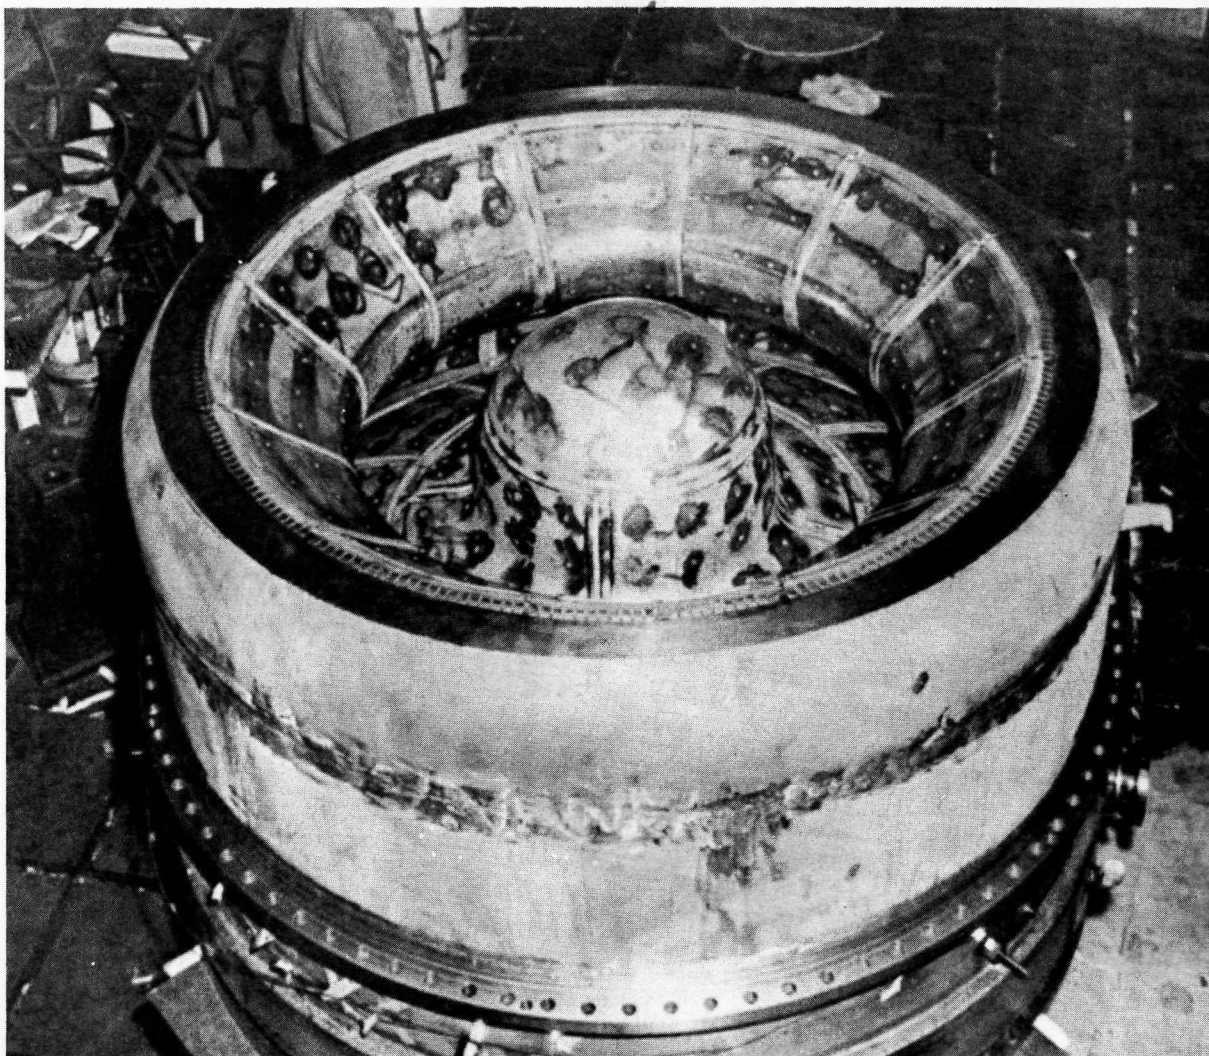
Rear shield plug assembly (Neg. U36144)
